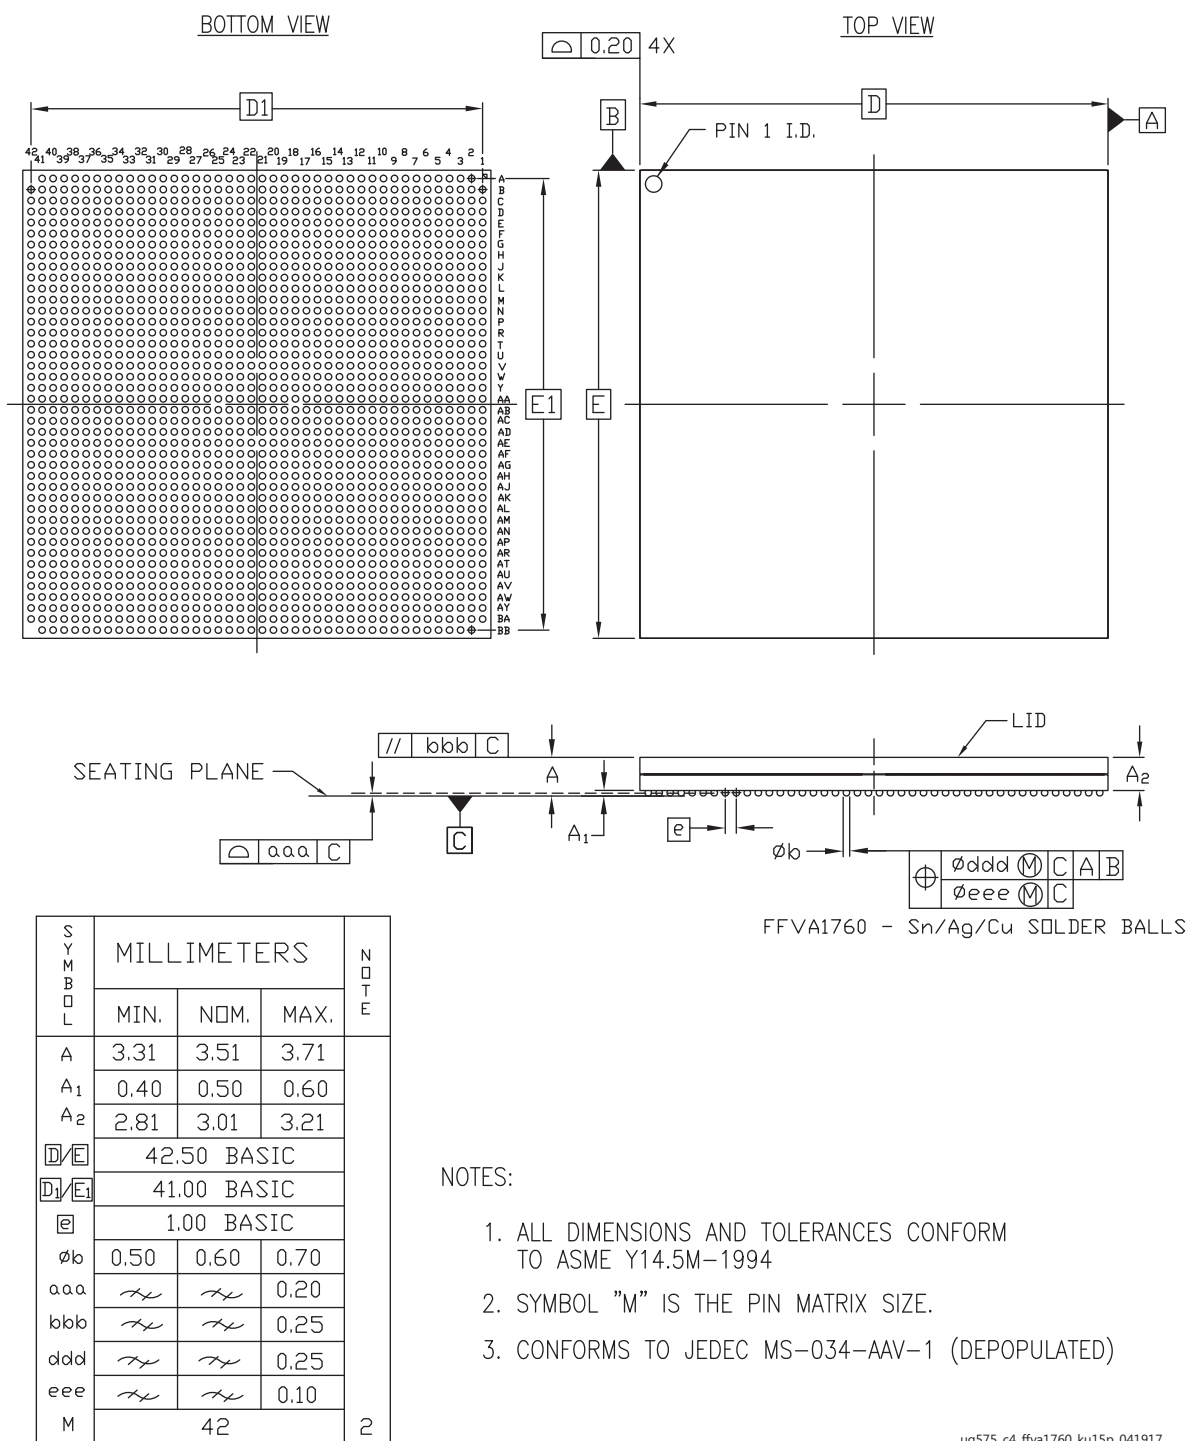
Package Dimensions for FFVA1760 (XCKU15P)
